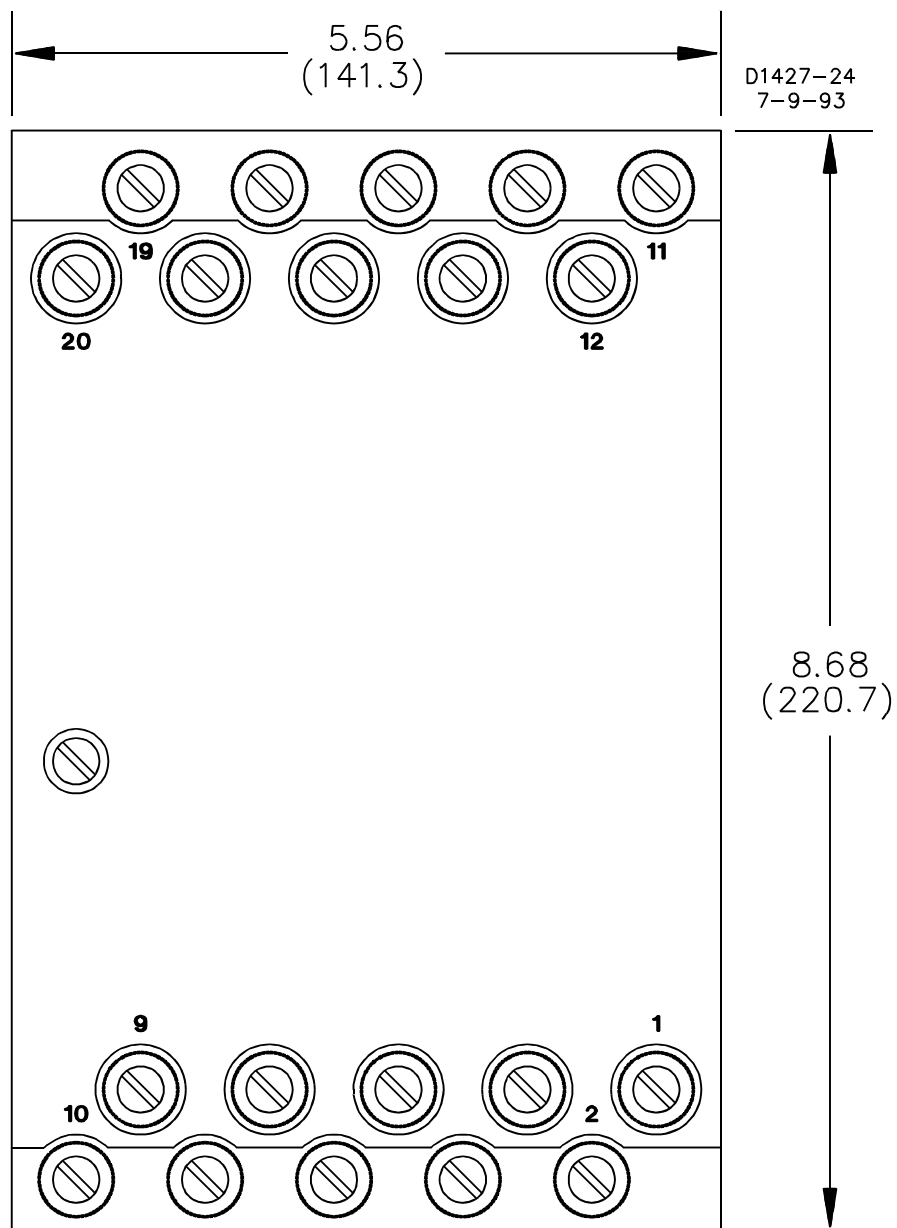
S1 Case, Double-Ended, Semi-Flush Mounting, Outline Dimensions, Rear View
